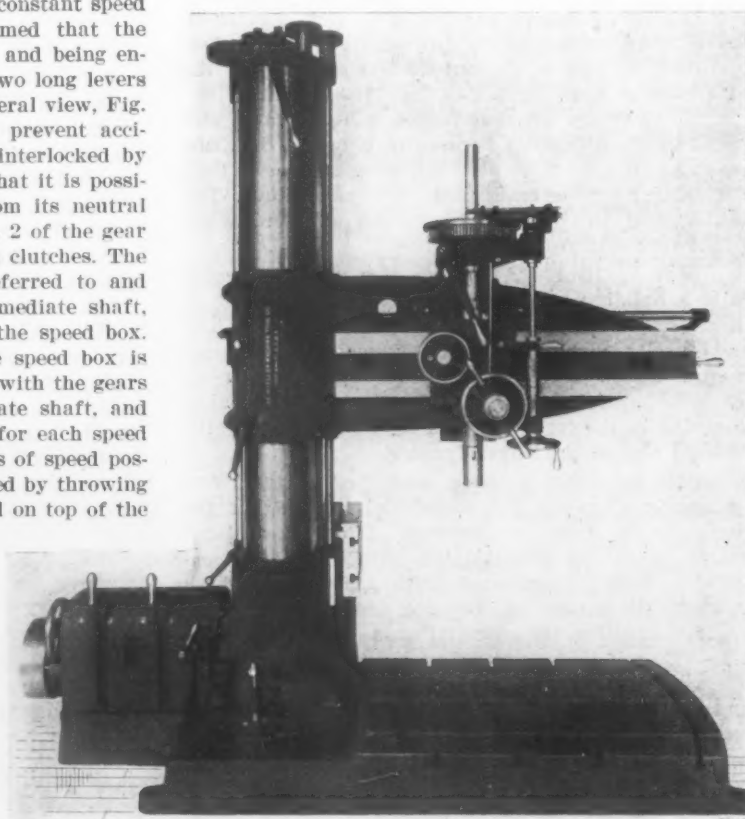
A New 4-ft. Radial Drill Built by the Mueller Machine Tool Company, Cincinnati, Ohio.
